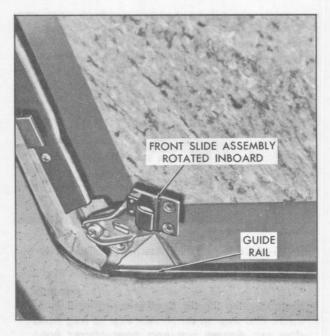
Front Slide Assembly Clear Of Guide Rail
